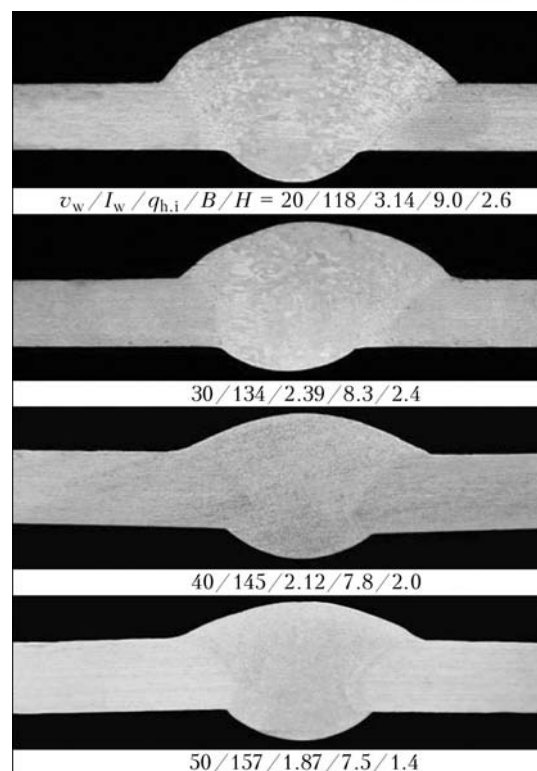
Influence of welding speed, welding current and welding heat input on geometry of welded joints of 1915T1 alloy
